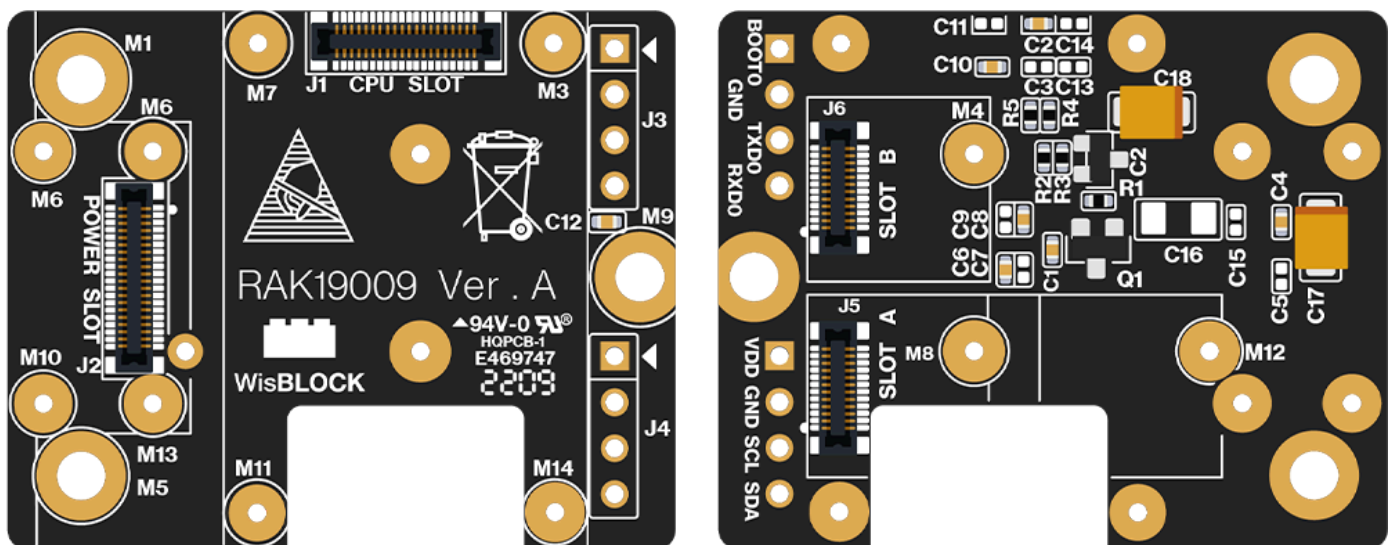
RAK19009 WisBlock Mini Base Top (Left) and Bottom (Right) View
